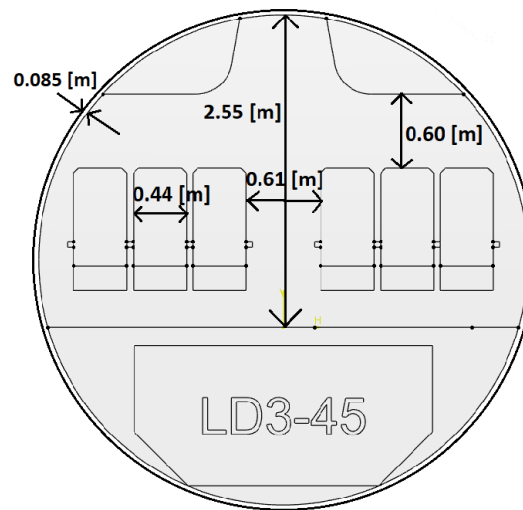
Cabin and cargo hold cross-section with dimensions in metres
